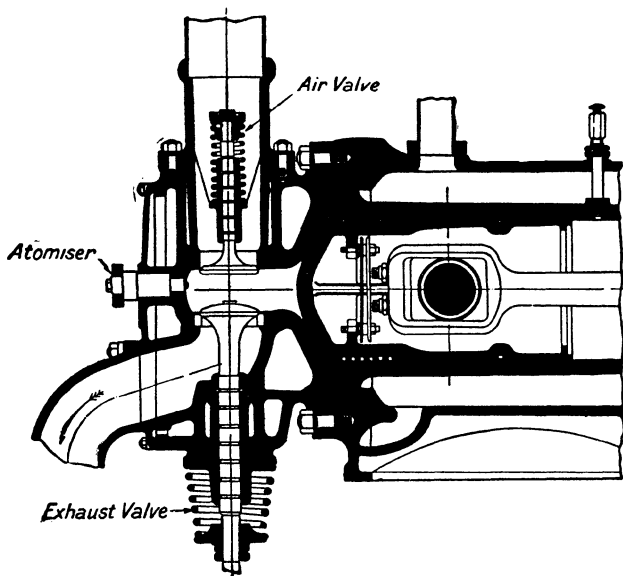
Ruston Heavy-oil Engine (1915 Type)
